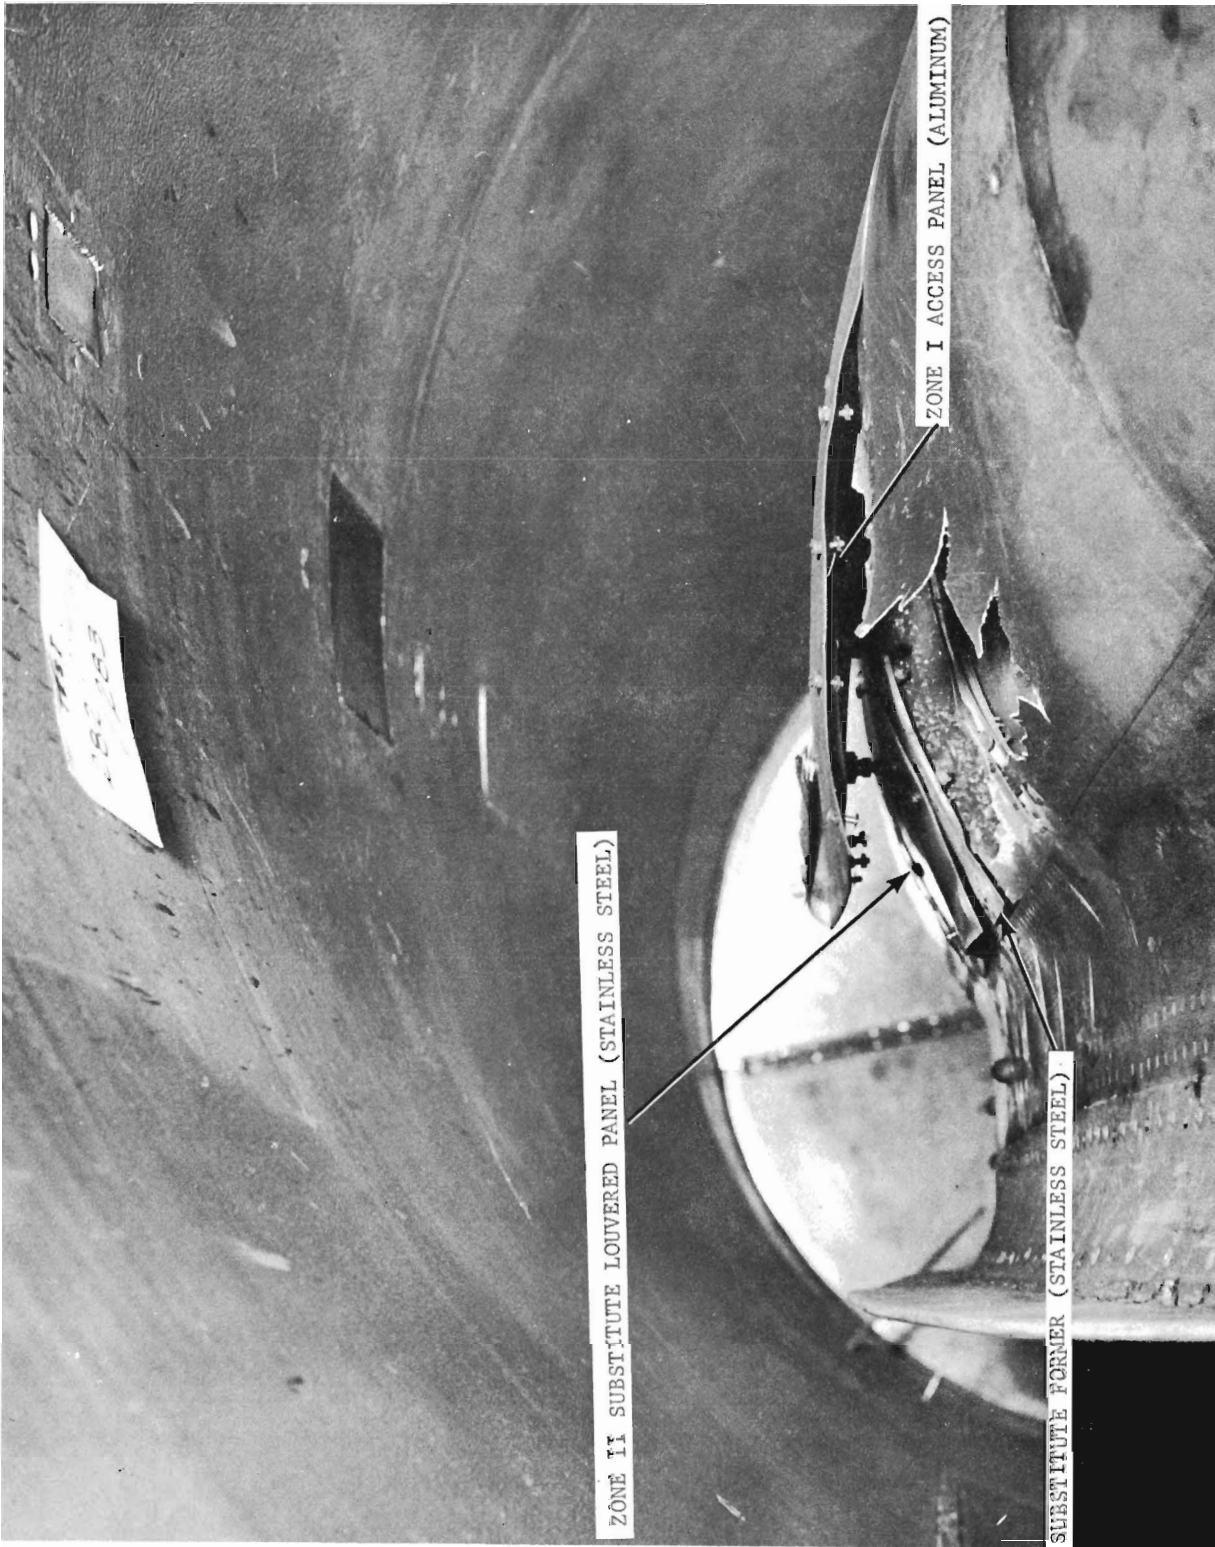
EXTERNAL VIEW OF DAMAGE TO ZONE I ALUMINUM ACCESS PANEL, NACELLE FORMER, AND SKIN
